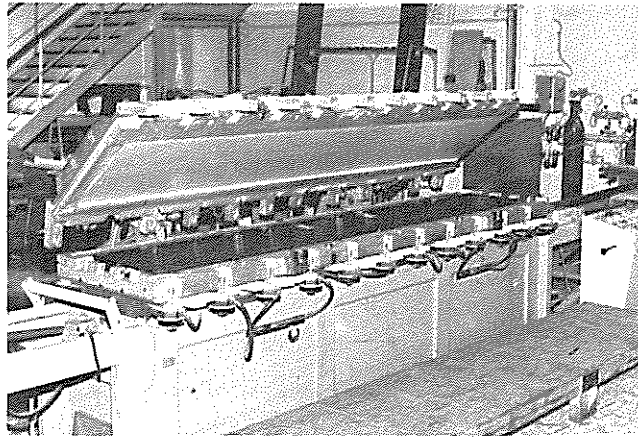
MOULDING TOOL FOR DAUPHIN STABILIZER
